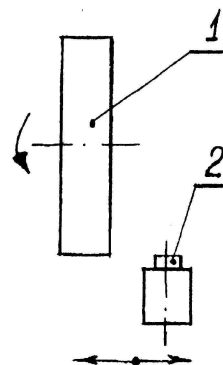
Scheme of profiling of STM on $R = 20$ mm on the machine tool of model 3В642: 1 — diamond wheel 1А1 40х16х10х3 АС15 80/63 4 МС6; 2 — sample of STM, fixed by a vacuum soldering in steel holder
